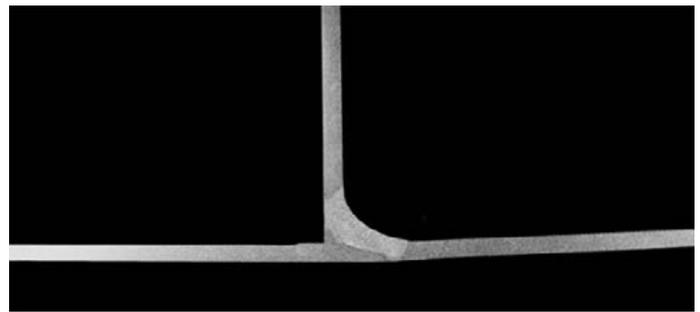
Macrostructure of the T-joint made of 1.5 mm thick sheets using the TOPTIG method and the parameters presented in Table 1
